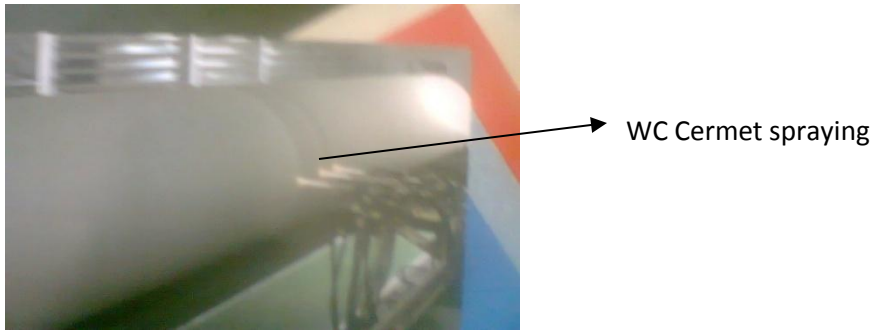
WC Cermet spraying on paper mill roll using HVOF
